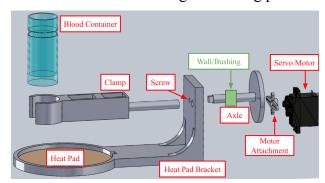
A diagram that separates all the components of the motor assembly. The green box is representative of a larger component and can be better seen in Figure 39.b
